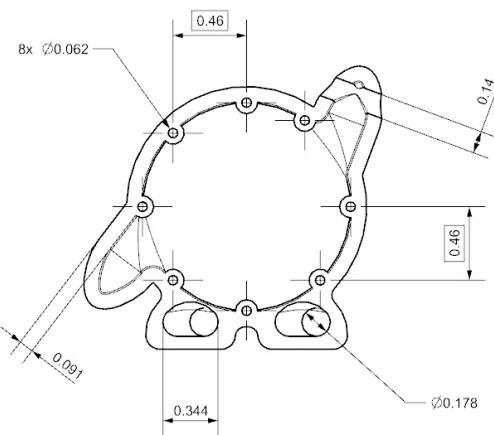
Dimensioned CAD Drawing of Kirby's Back (Sheet 2/2)
